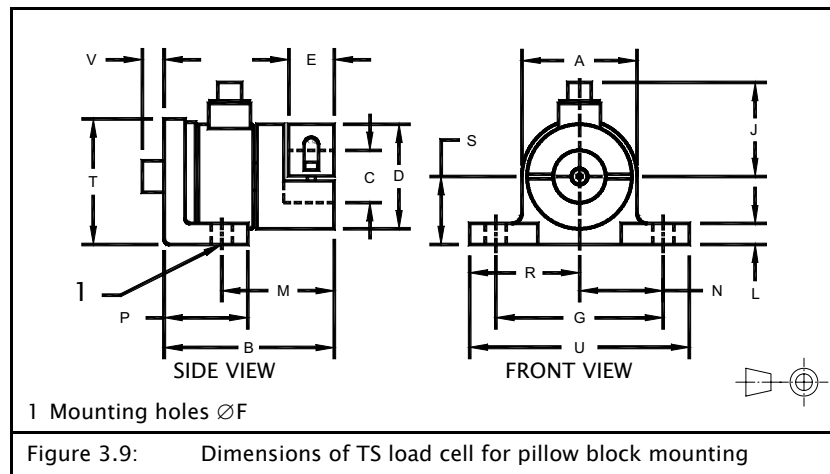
Dimensions of TS load cell for pillow block mounting
